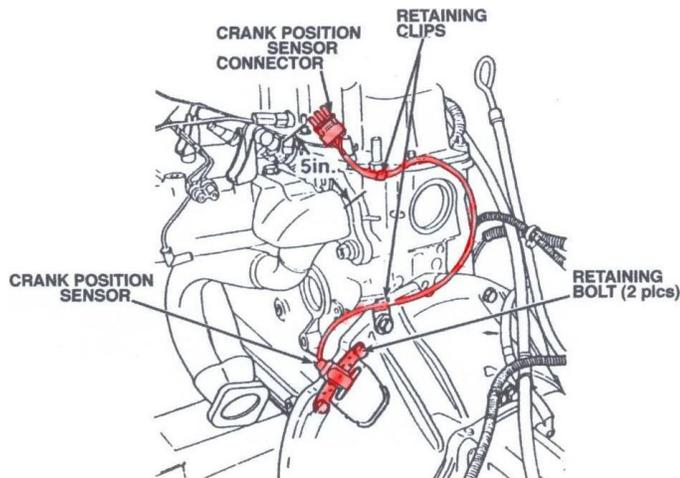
Location for crank shaft position sensor in 4-wheeler vehicle.
